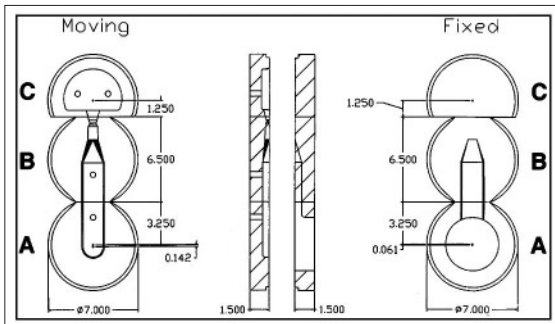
Detail of the die inserts for the test castings. This design allowed for more than one alloy to be simultaneously evaluated.
